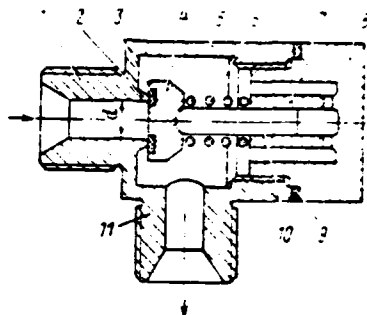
The check valve: 1 - intake connecting pipe; 2 - saddle; 3 - ferrule; 4 - disc; 5 - housing; 6 - spring; 7 - being guided; 8 - cover/cap; 9 - ply; 10 stock/rod; 11 - output connecting pipe.
